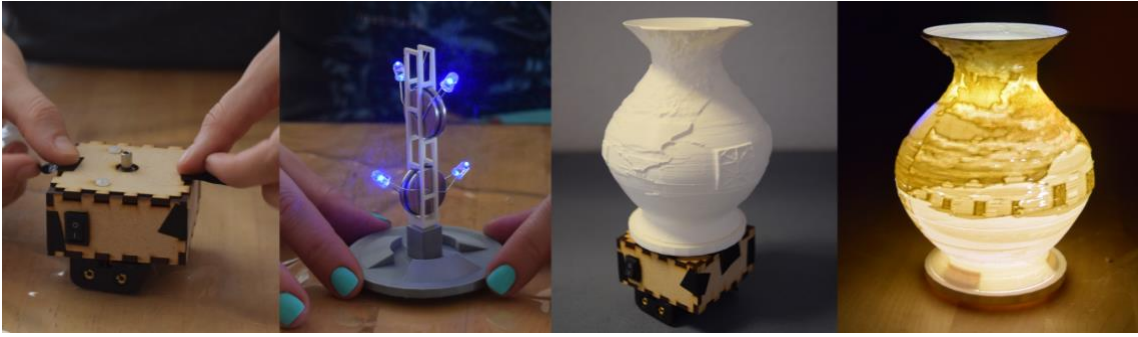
Lithobox physical assembly from left to right: makercase box containing rotator, 3D-printed platform and tower with lights, and examples of rotating, illuminated 3D printed lithophanes
